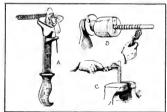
Handy Tool for the Repair Shop: A, the Perfection Spring Winder; B. Depicting Its I se in the Lathe; C. How Operated in the Vise.
